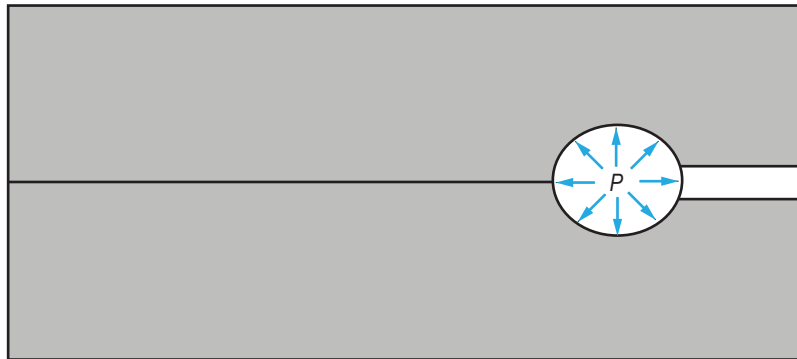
Internal pressure (P) around the tool opening the weld seam gap.
